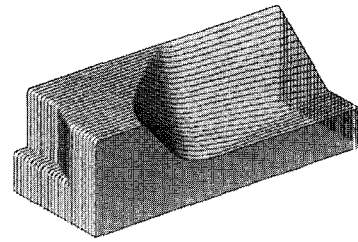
Profiles of slicing planes for a part of the PEL tool
